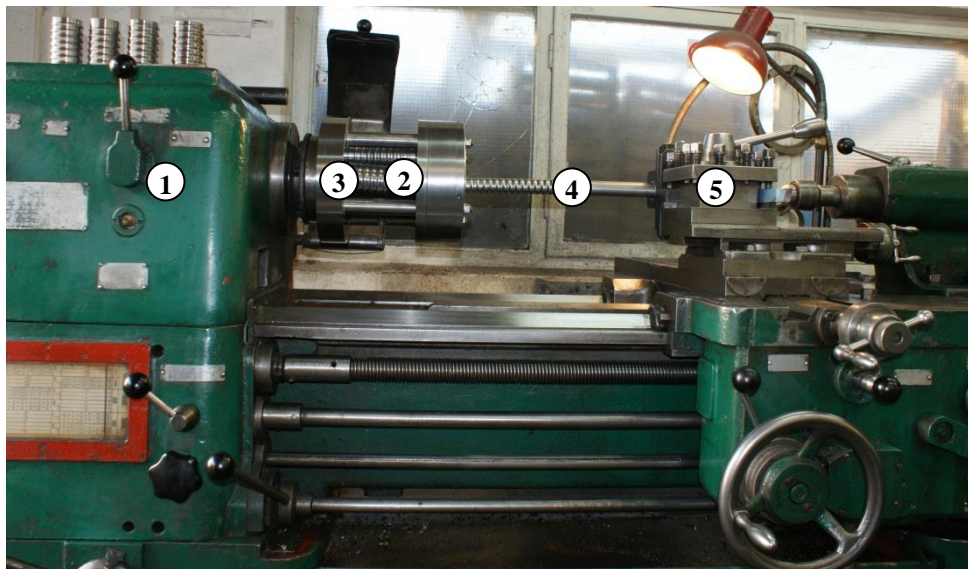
Stand for the external round thread rolling with quick pitch on long pipe: 1 – cruising lathe, 2 – angle head, 3 – rolls, 4 – workpiece (bar or pipe), 5 – tailstock
